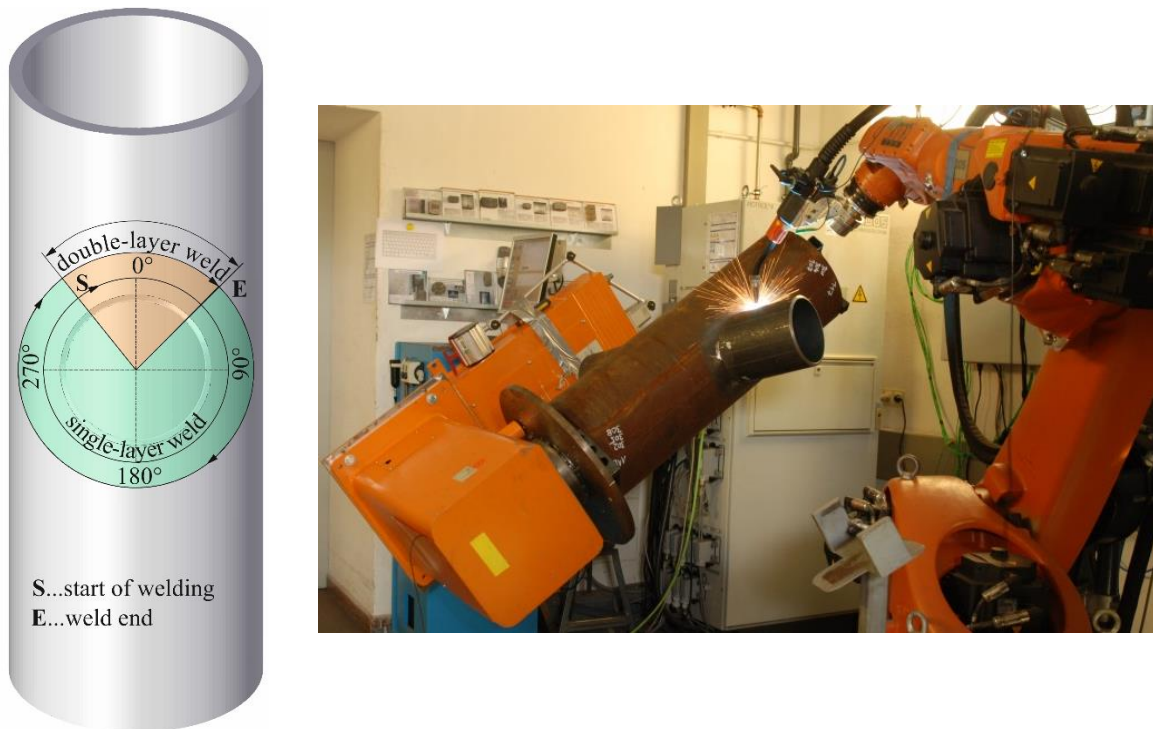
Left: Setup of the gas metal arc welding process along the weld trajectory according to [4]; Right: Automated gas metal arc welding procedure of a tubular X-joint
